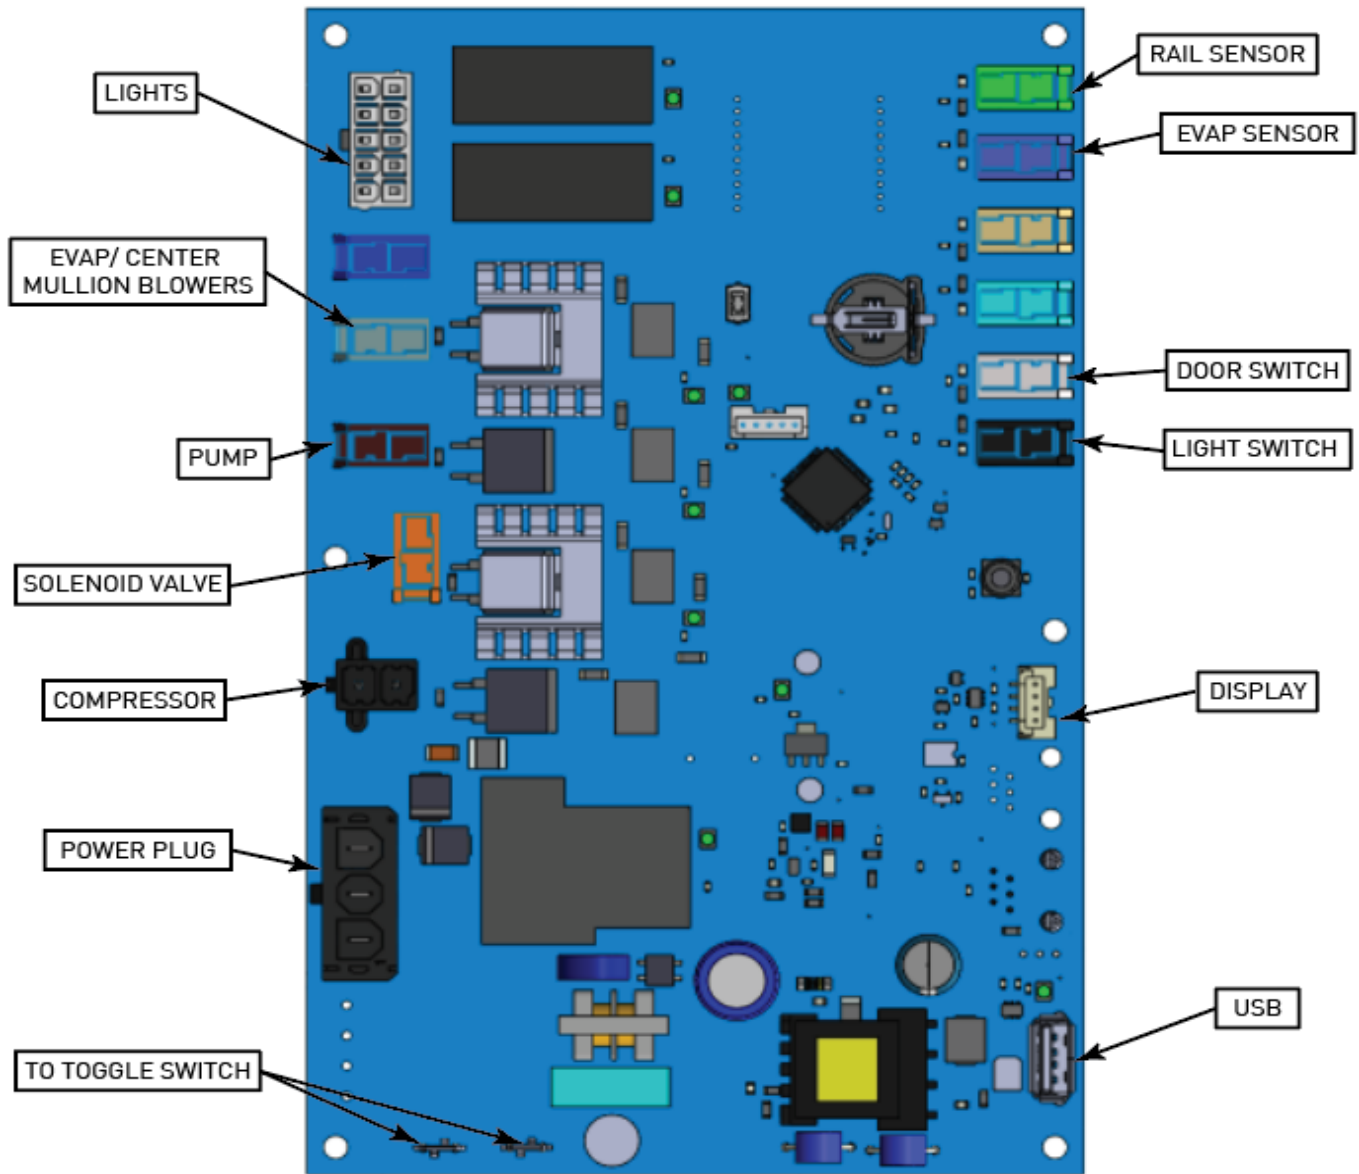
POWER MODULE ACCESS (CONTROL BOARD)
